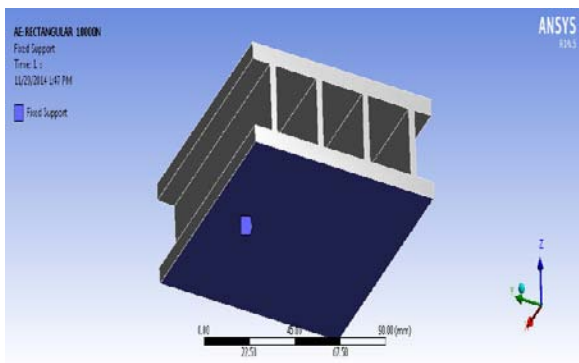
Position of fixing bottom plate in Rectangular steel structure
